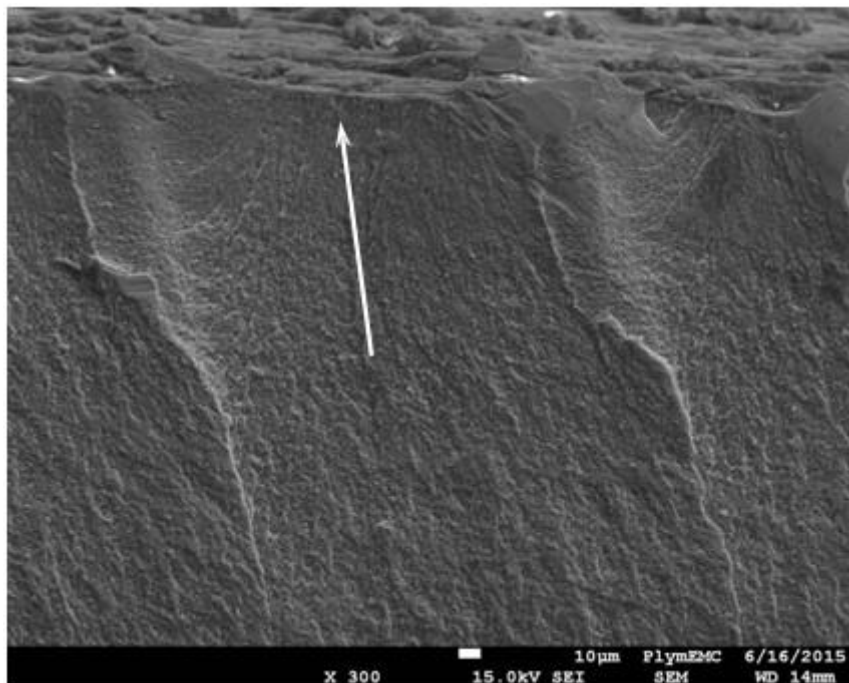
SEM fractograph showing crack initiation (arrow) between surface tool marks in tensile fatigue specimen W121. The small white bar at the bottom of the picture is a 10 µm marker.
